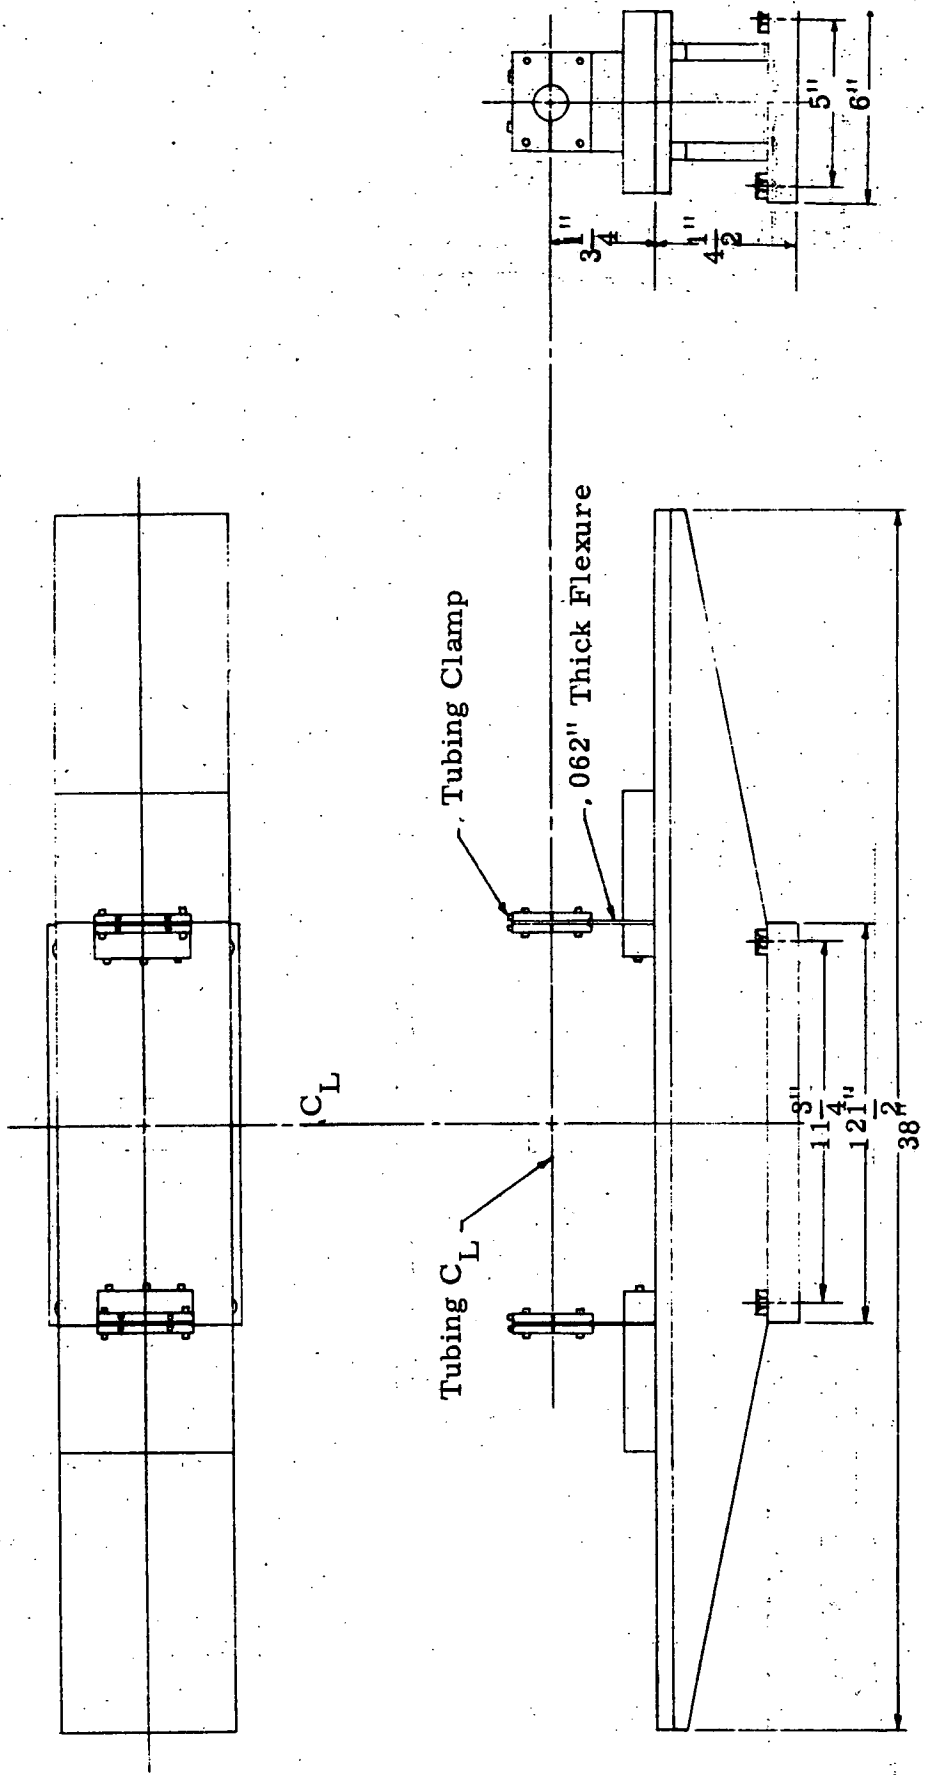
Assembly Drawing of Connector-tubing Vibration Test Fixture
